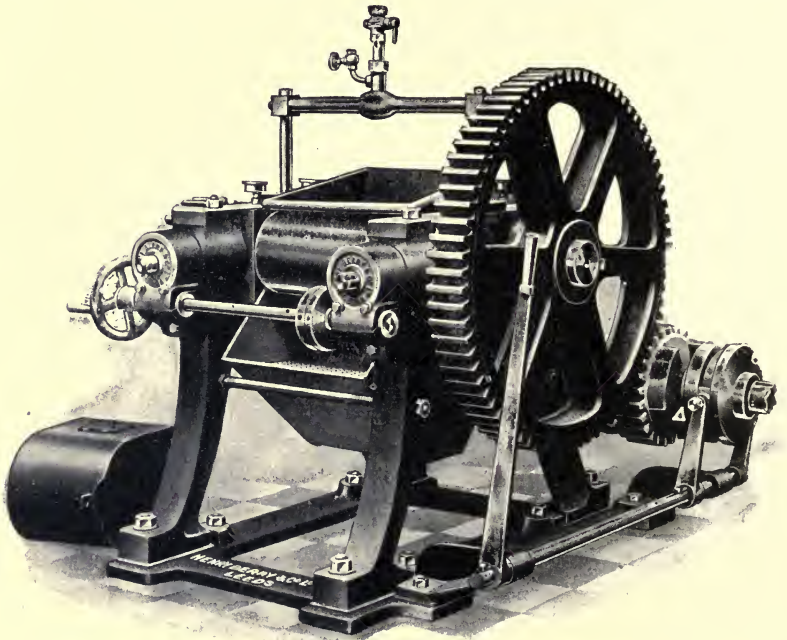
A Claw-clutch-driven Mill (H. Berry & Co., Leeds).
